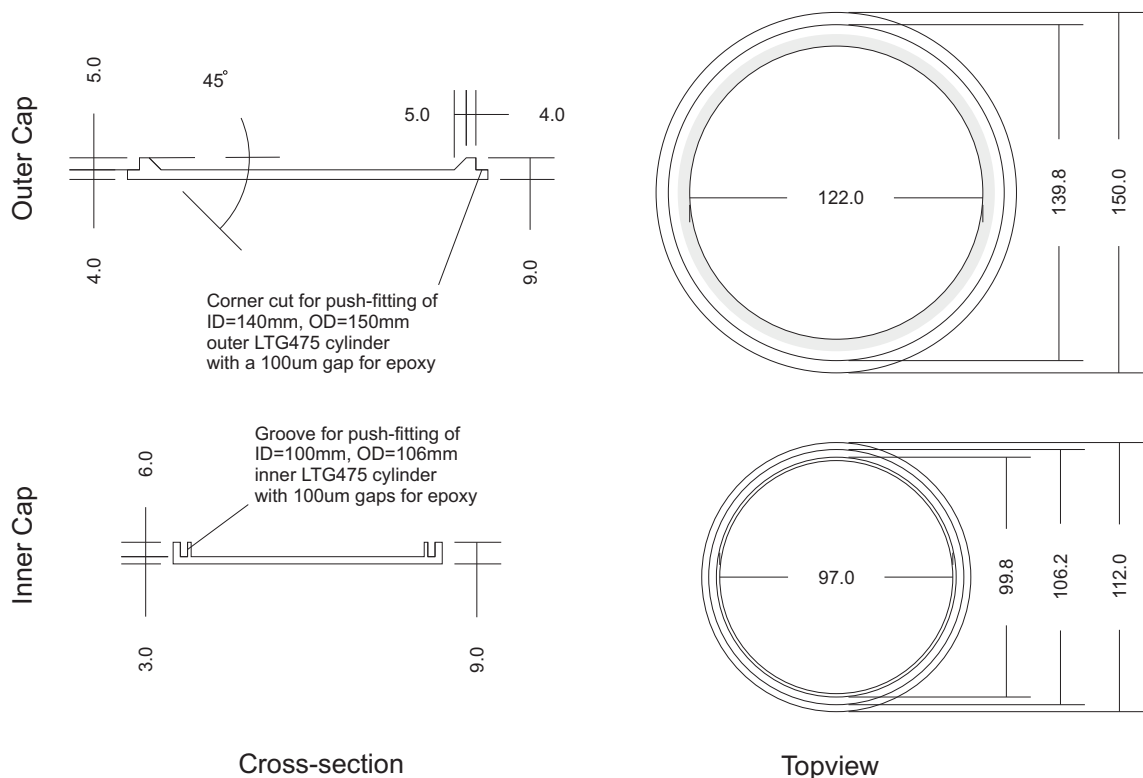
Technical drawing of the G10CR fibreglass endcaps.
